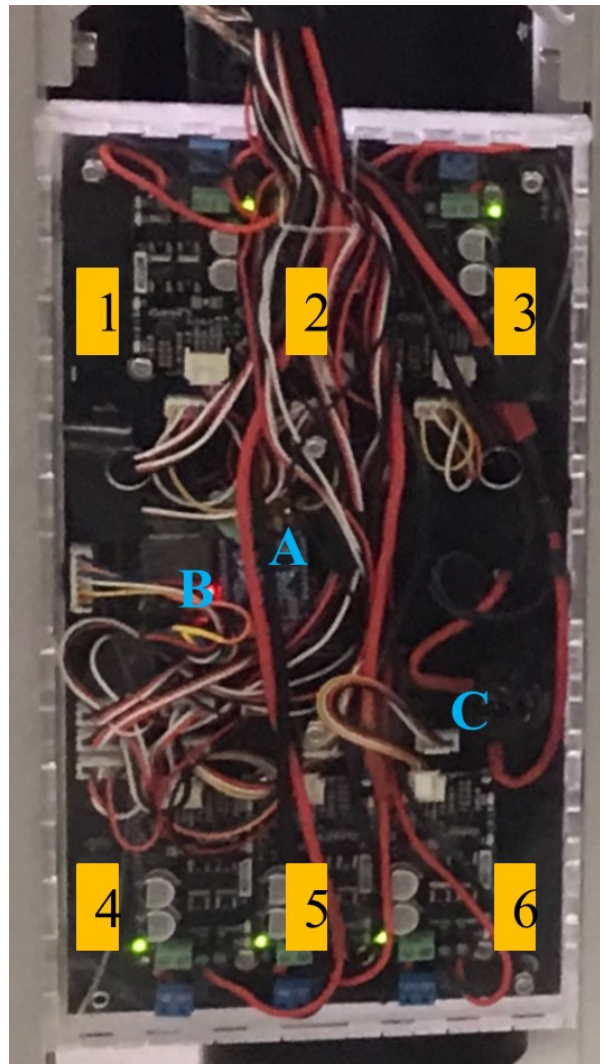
THE PCB AFTER COMPONENT SOLDERING
